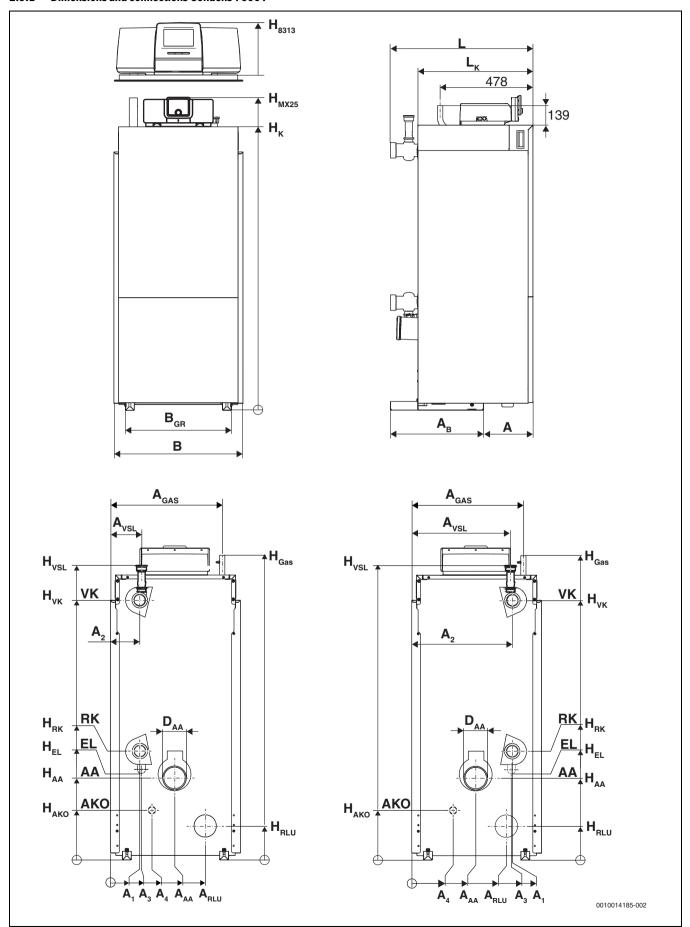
Dimensions and connections for Condens 7000 F, 75...100 kW (right and left-hand version; dimensions in mm)
